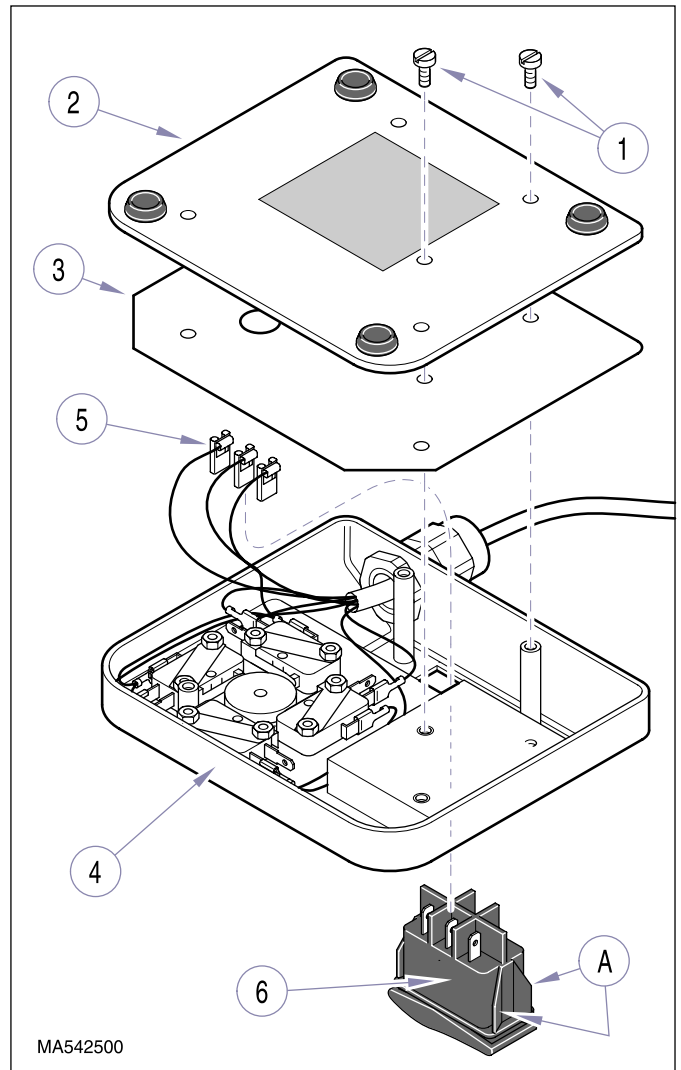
Auto Exit / Operate Switch Removal / Installation
